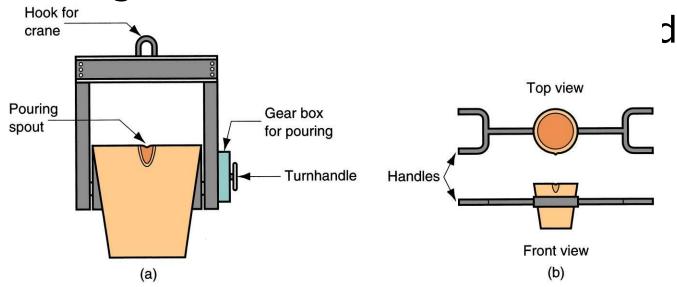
Two common types of ladles: (a) crane ladle, and (b) two-man ladle.
